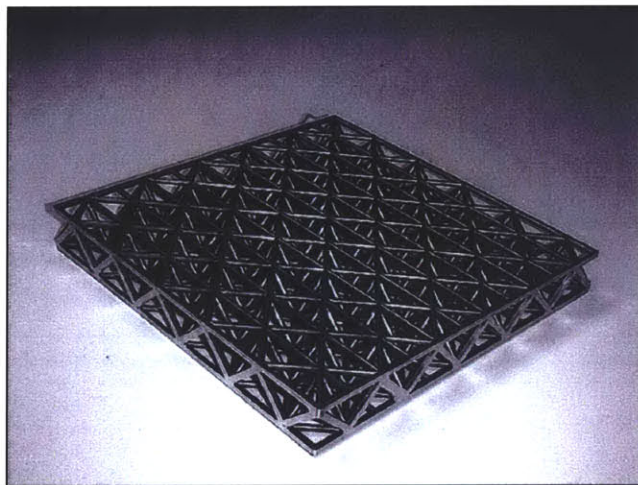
Photograph of a 3D truss structure made from an aluminum casting alloy (Wallach and Gibson, 2001).
